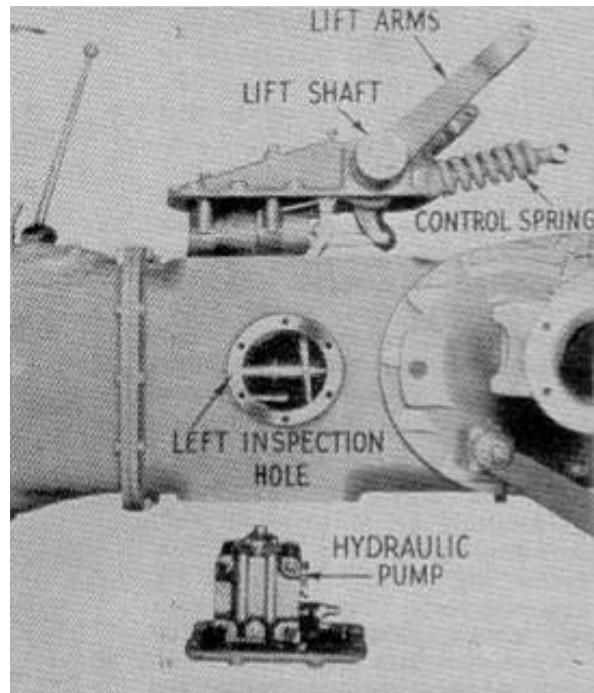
Left cover assembly and hydraulic pump being installed to rear axle center housing.
